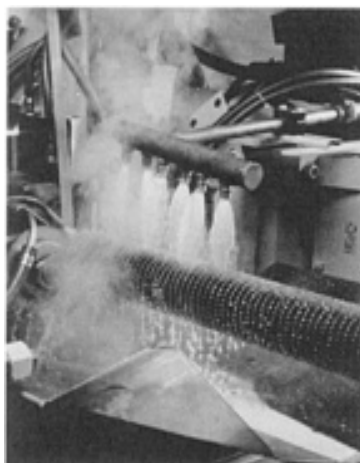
MANUFACTURING A SPIRAL FIN TUBE USING HIGH-FREQUENCY WELDING
